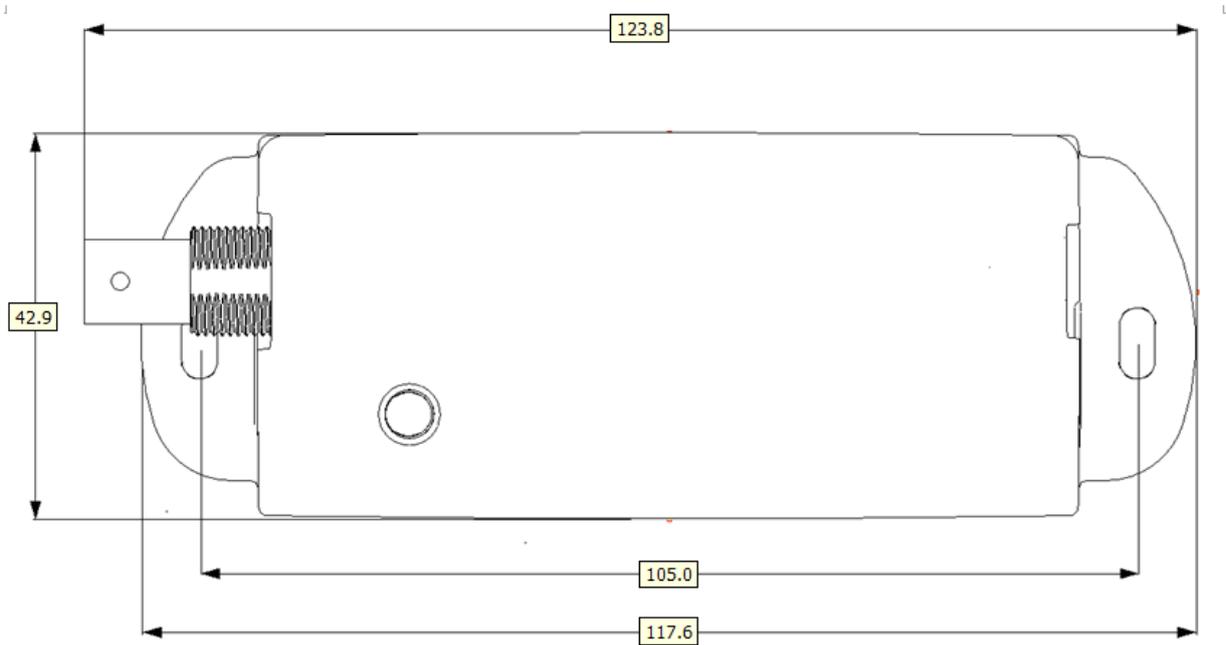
LDSBus Dissolved Oxygen Sensor Adapter Dimension – Top View
